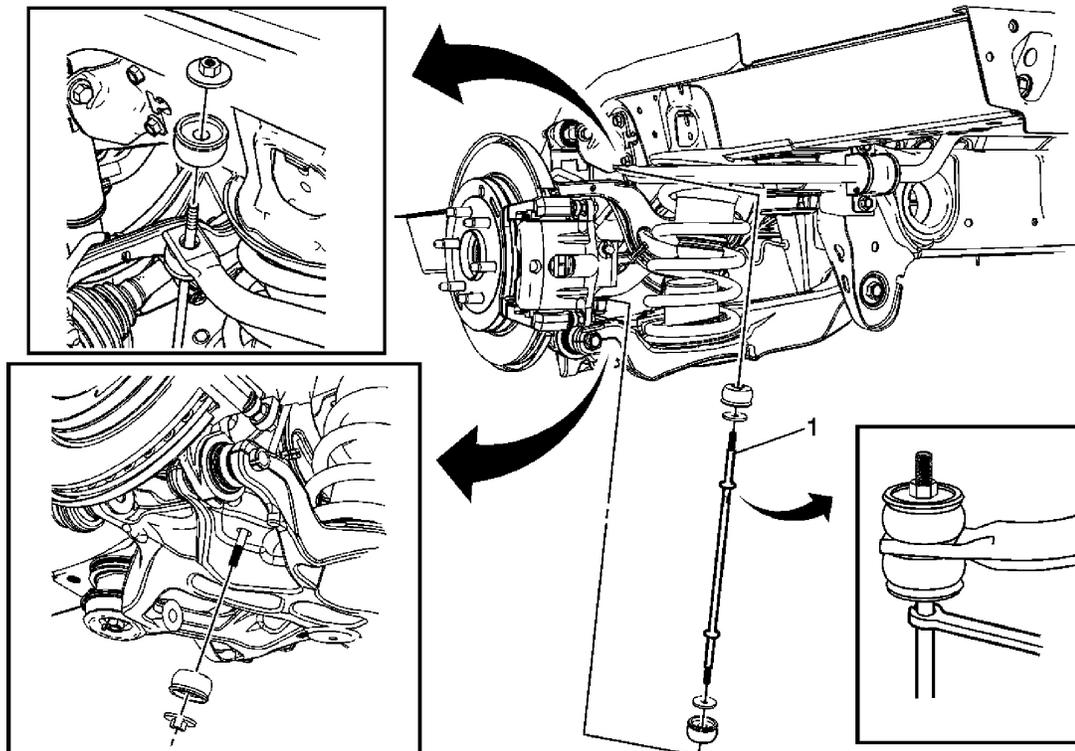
Identifying Stabilizer Shaft Insulator
